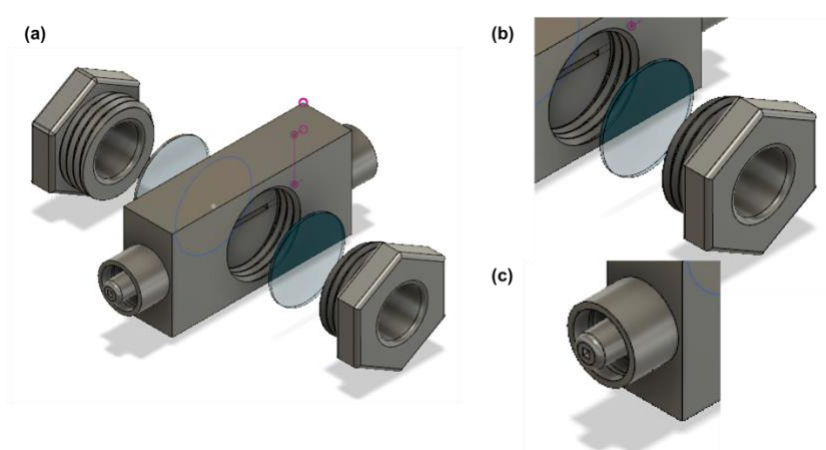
(a) CAD rendering of the fourth, and final, prototype developed. This prototype utilised enclosed channels with (b) a small, threaded window port and accompanying 3D-printed screw. (c) Luer lock inlets are used to provide a sealed conduit from tubing to channel.
